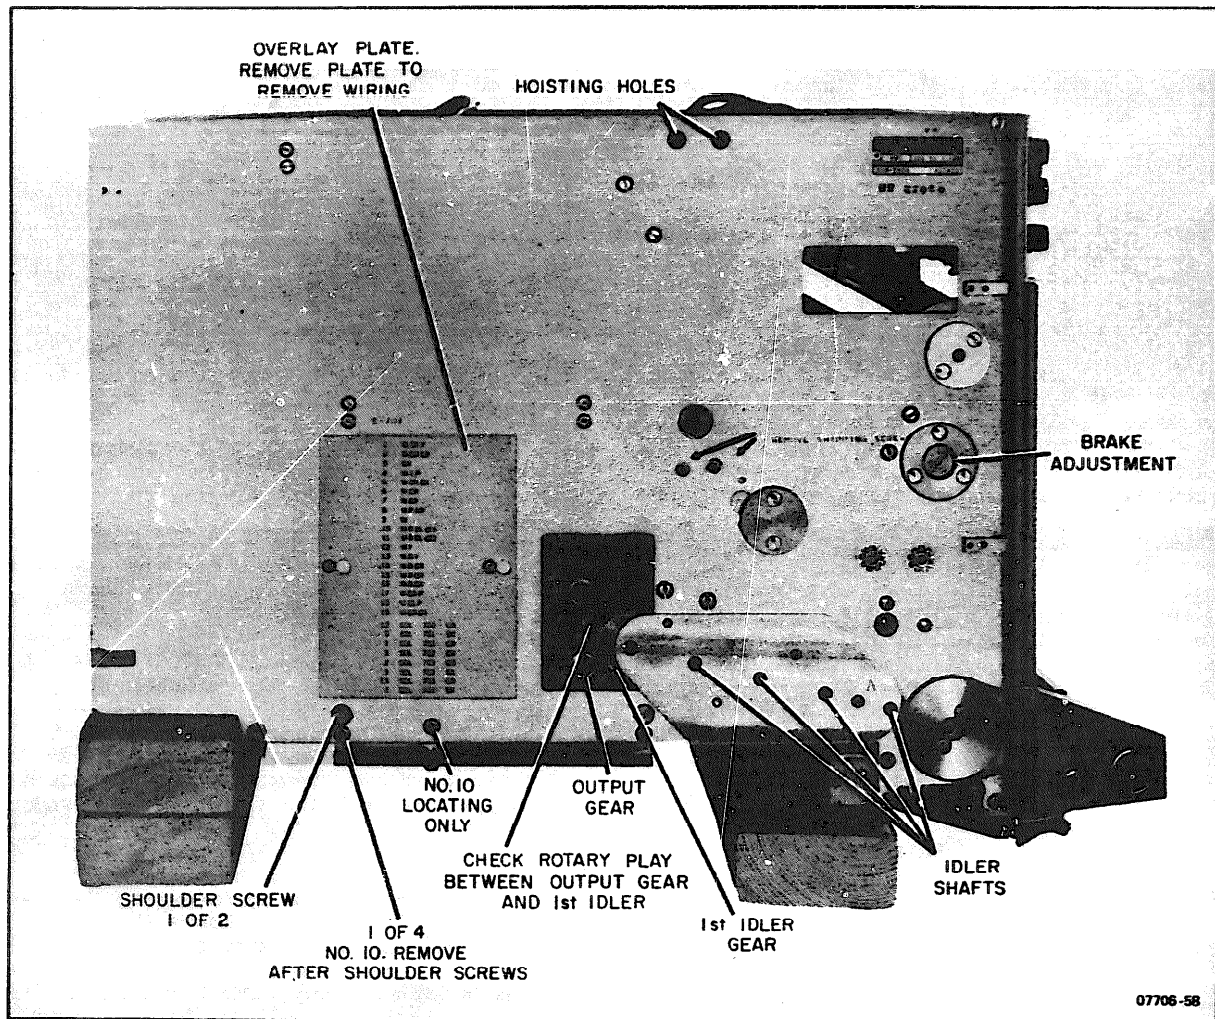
Recorder Removed from Cabinet, Prepared for Gear Box Removal
